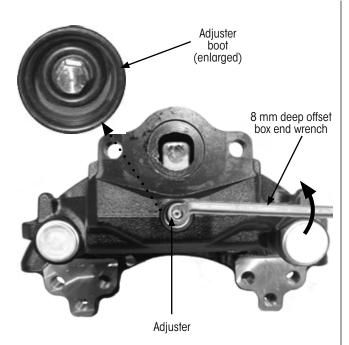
Rotating adjuster with an 8 mm deep offset box end wrench
